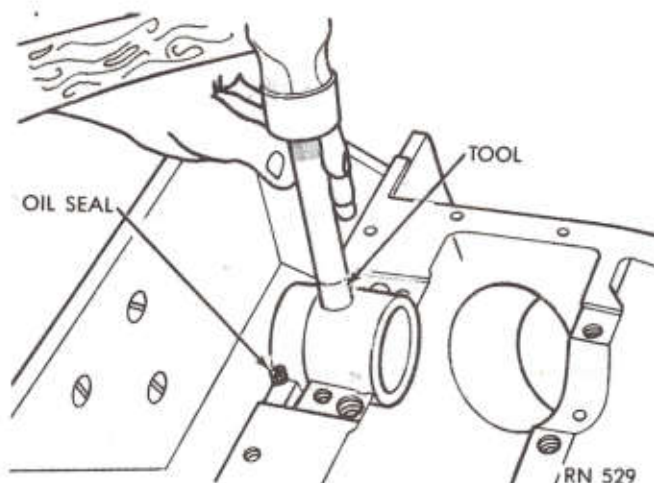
Installing Upper (and Lower) Oil Seal with Tool C-3511
